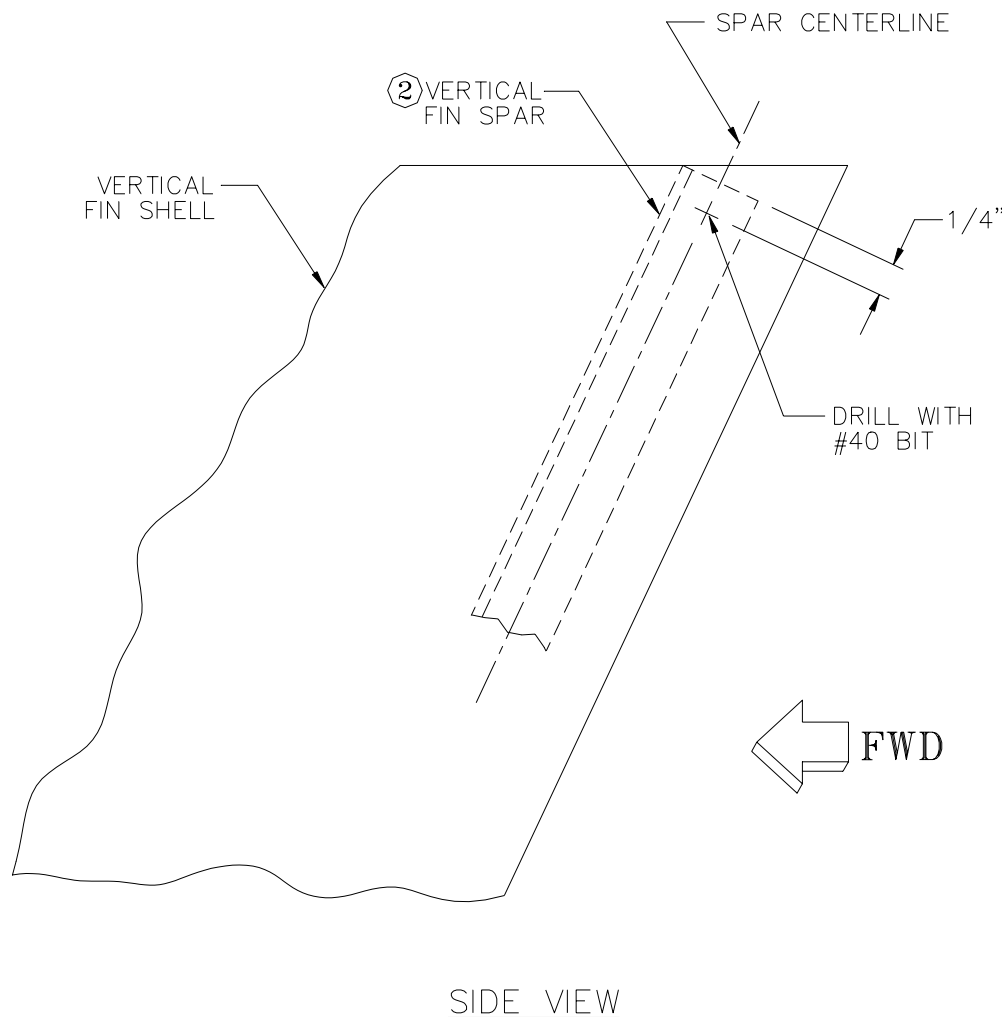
Marking and Drilling the Top Index Holes Through the Spar Flanges
